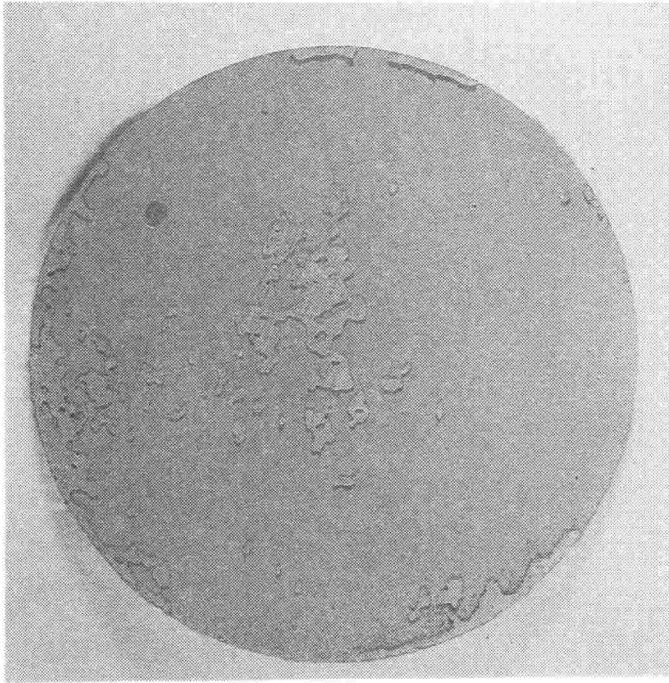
Fracture surface of steel-steel brazing joint after tension test. (d=28mm)
